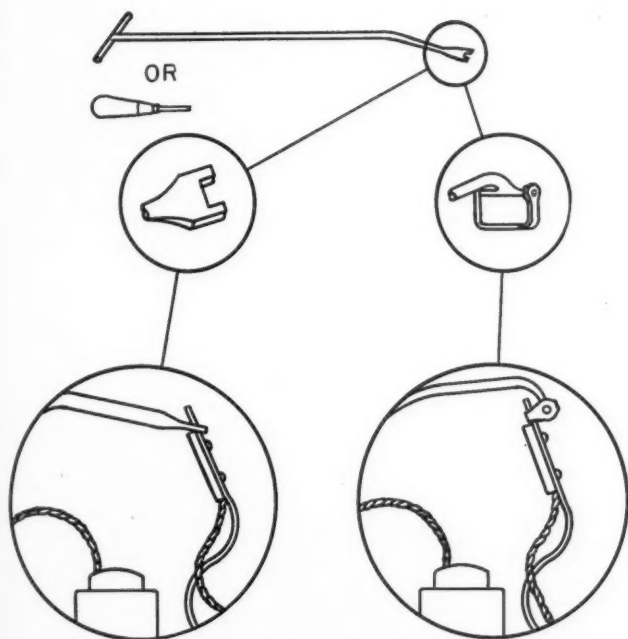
Lifting tools and how they are used on traction-motor brush springs
